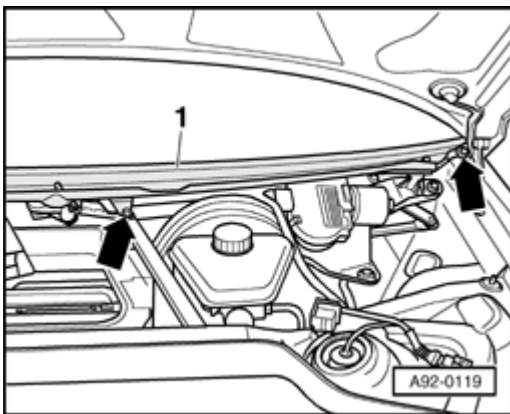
Removing Wind Deflector By Removing Bolts On Left/Right
